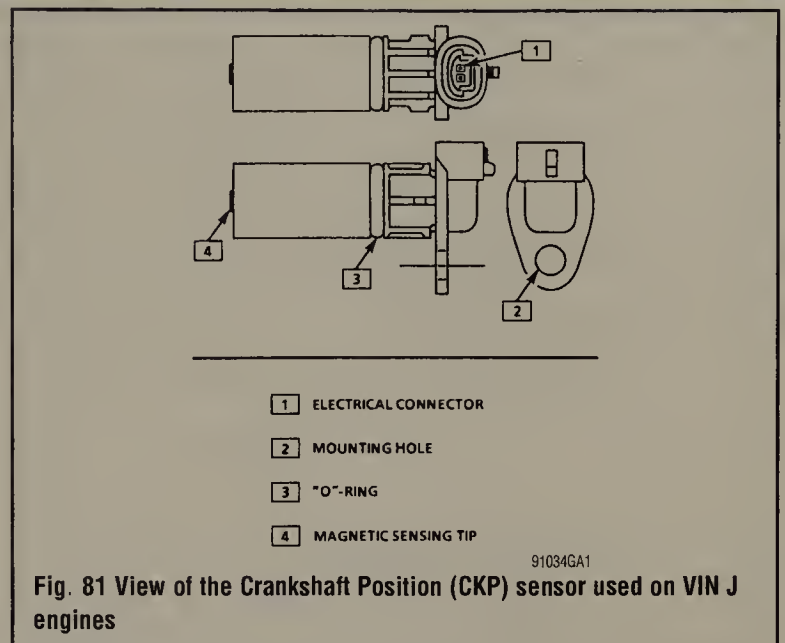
View of the Crankshaft Position (CKP) sensor used on VIN J engines
